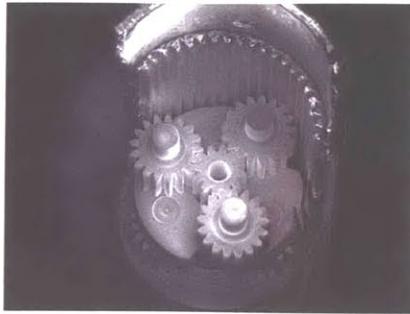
Scanning electron micrograph of micromotor gear assembly
